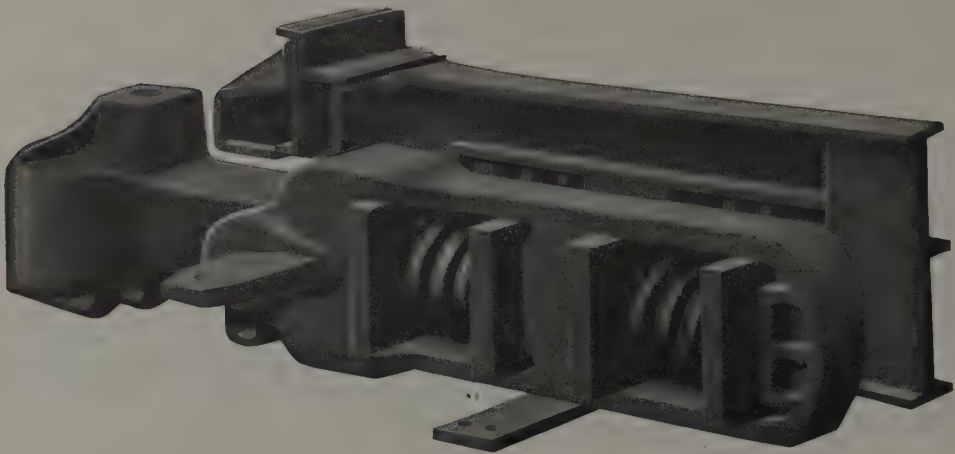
Application of Buckeye Cast Steel Keyed Yoke for Tandem Gears.
